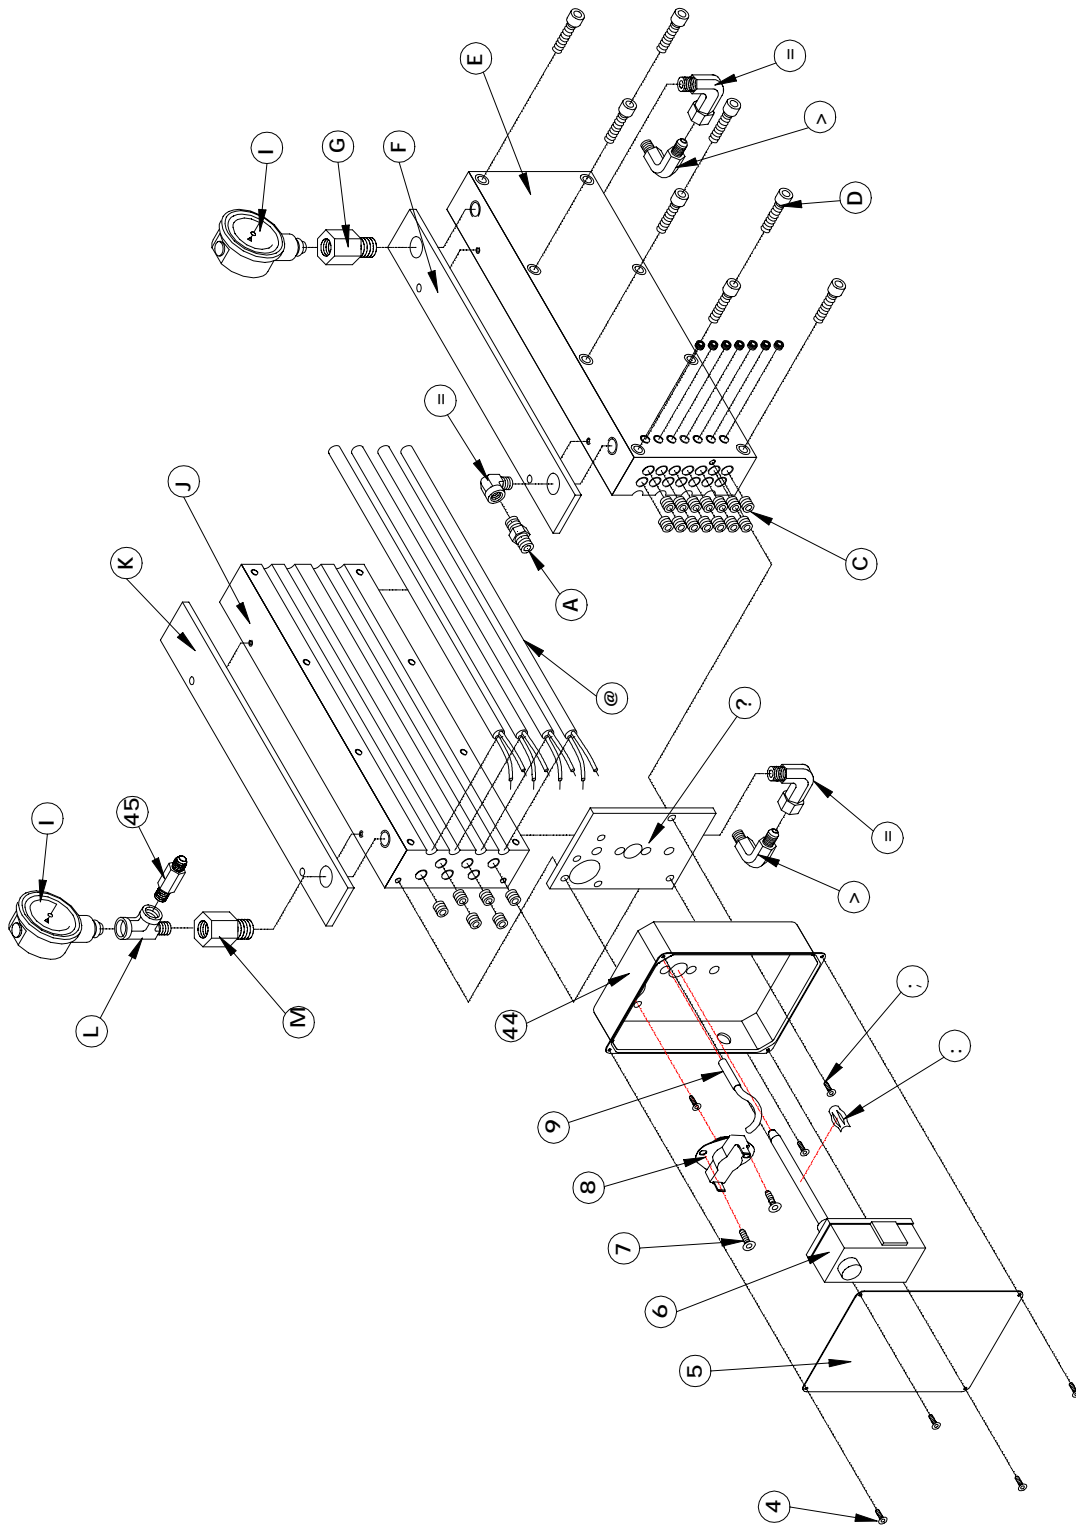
Primary Heater, (Part No. 57350-GE), Exploded View
